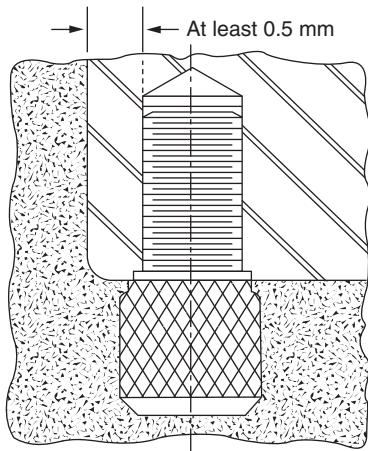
Avoid locating inserts too near the edge of the part. If insert supporting pins are used, the thin adjoining mould section may crack. Minimum allowable thickness for the mould section is 0.50 mm.
